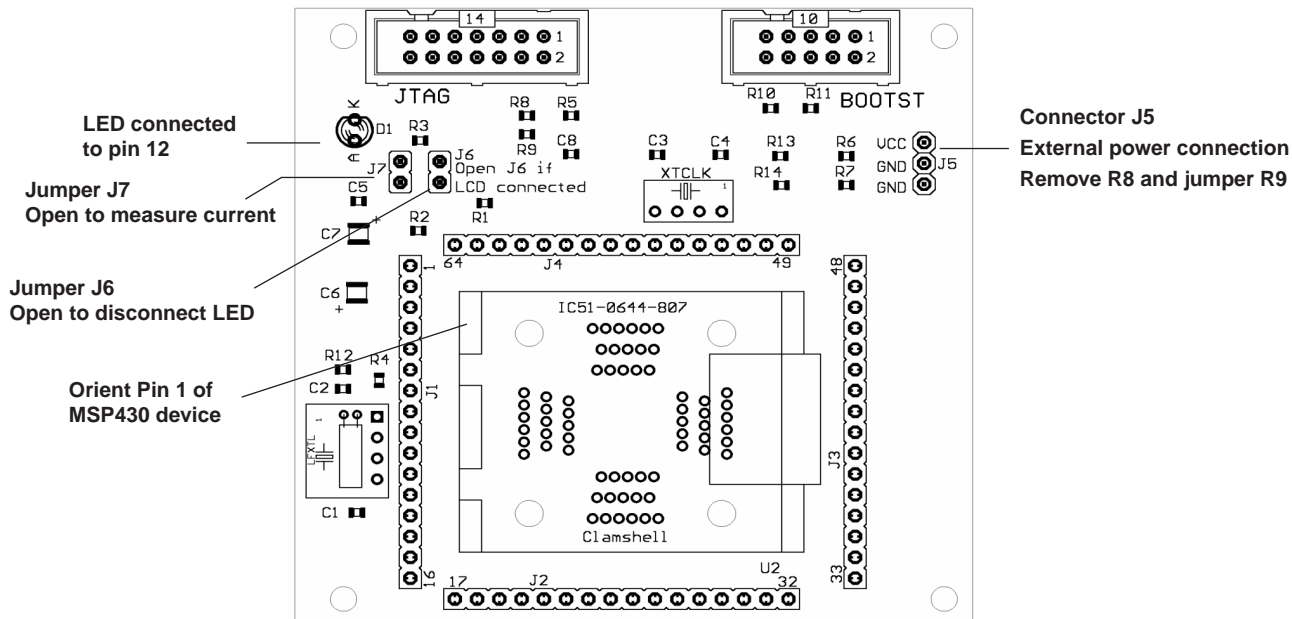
MSP-TS430PM64 Target Socket Module, PCB
